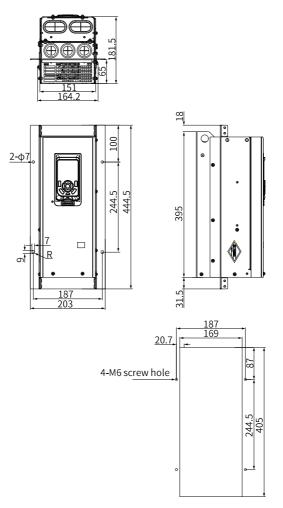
Mounting-hole dimensions (mm) of MD580-AZJ-A2T2
